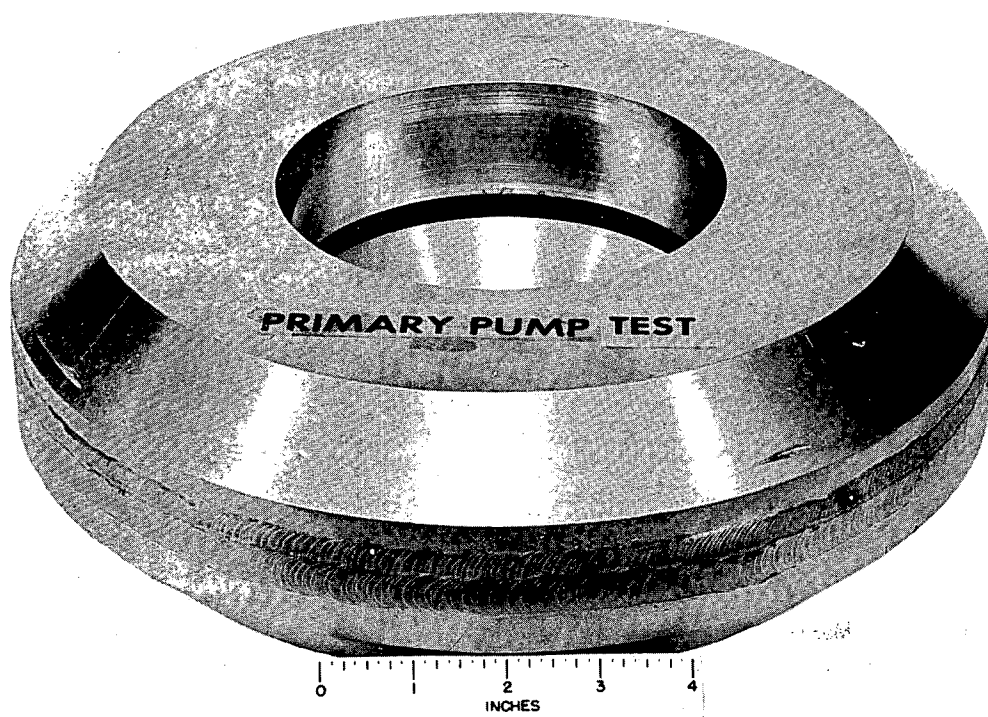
Inert-Arc-Welded Primary Pump Weld-Shrinkage Test.
